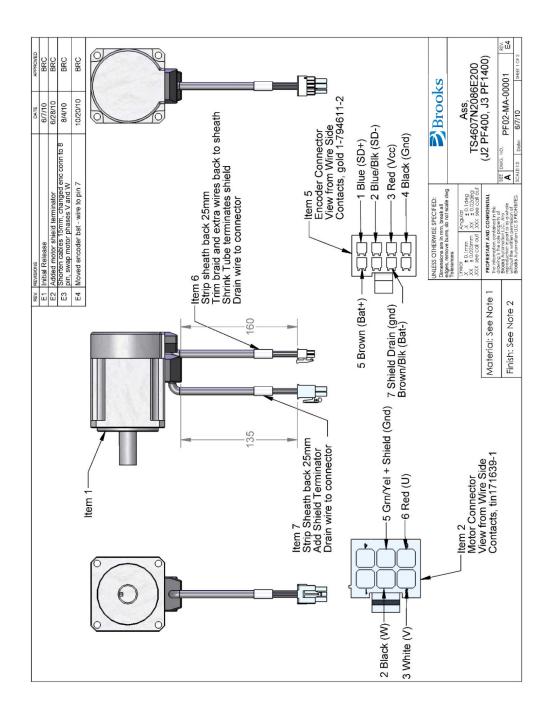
Assembly, TS4607N2086E200 (J2 PF400, J3 PF1400)
